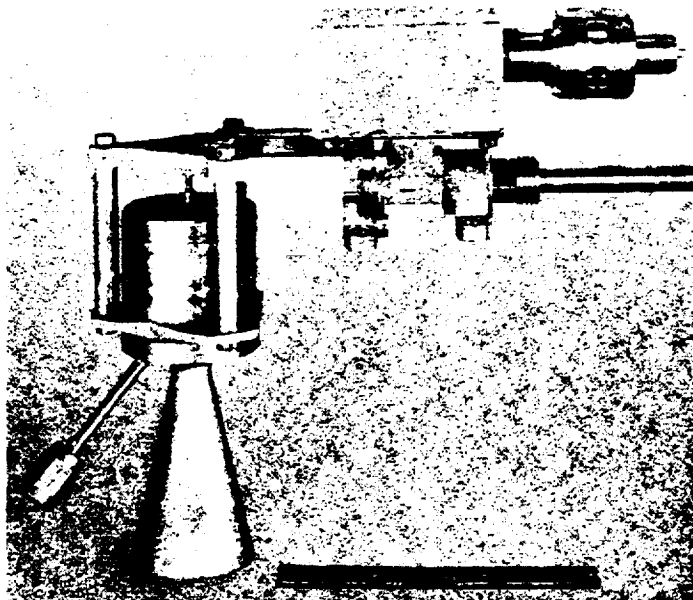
22N (5 LBF) THRUST CHAMBER AND VALVE ASSEMBLY (PHOTO 74-26274)
